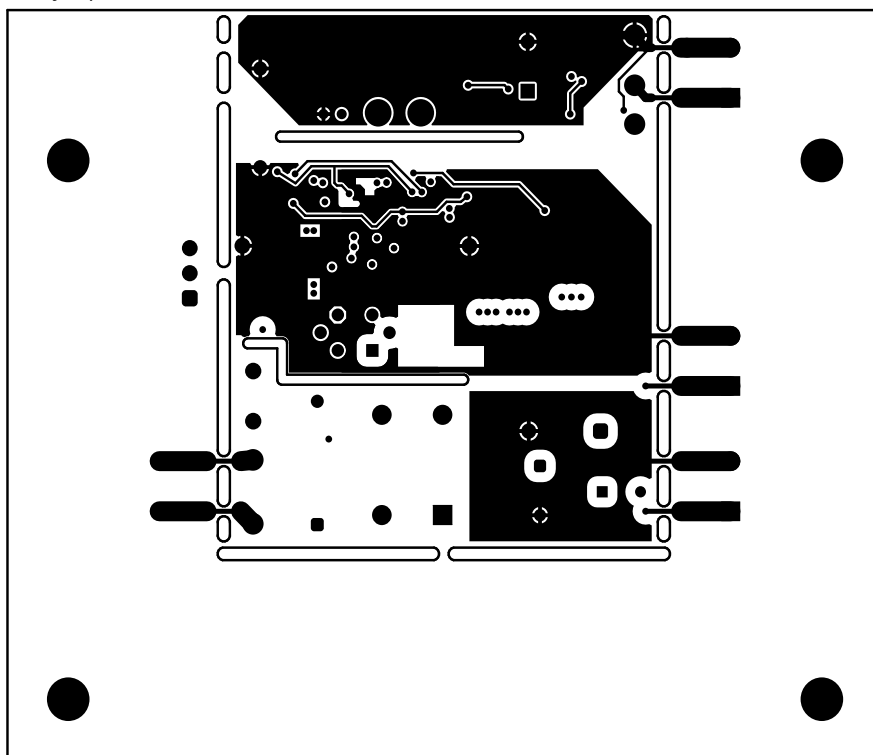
Inner Layer 1 (Second Layer) of PCB
